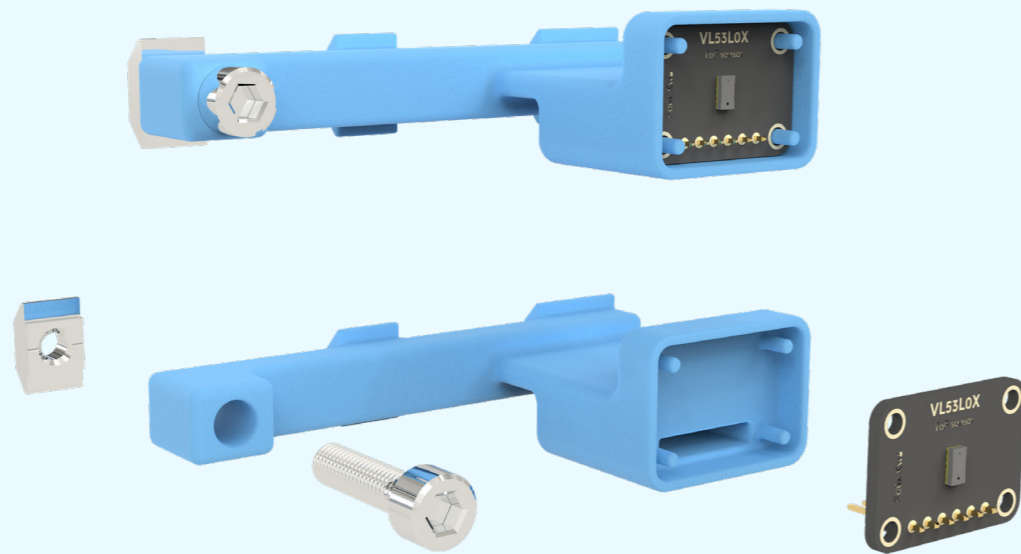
(top) The fully assembled sensor with all components. (bottom) An exploded view of the housing and all its components, excluding the 6 pin female connector.
